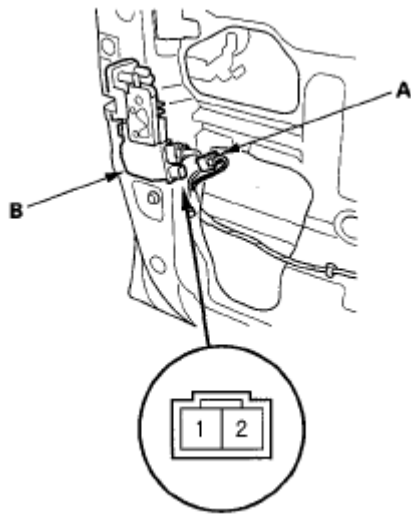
Identifying Door Lock Actuator 2P Connector Terminals (Driver's Door)
